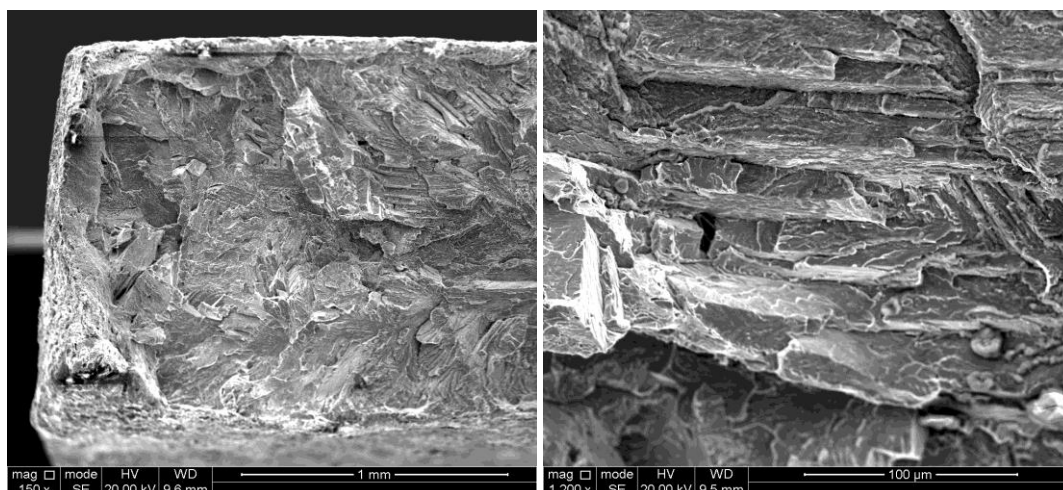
Fracture surface of alloy C Q&T tensile tested in air.
